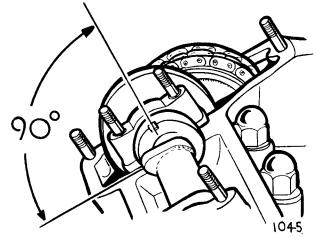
When fitting a camshaft the keyway must be at 90° to the camshaft cover face.
